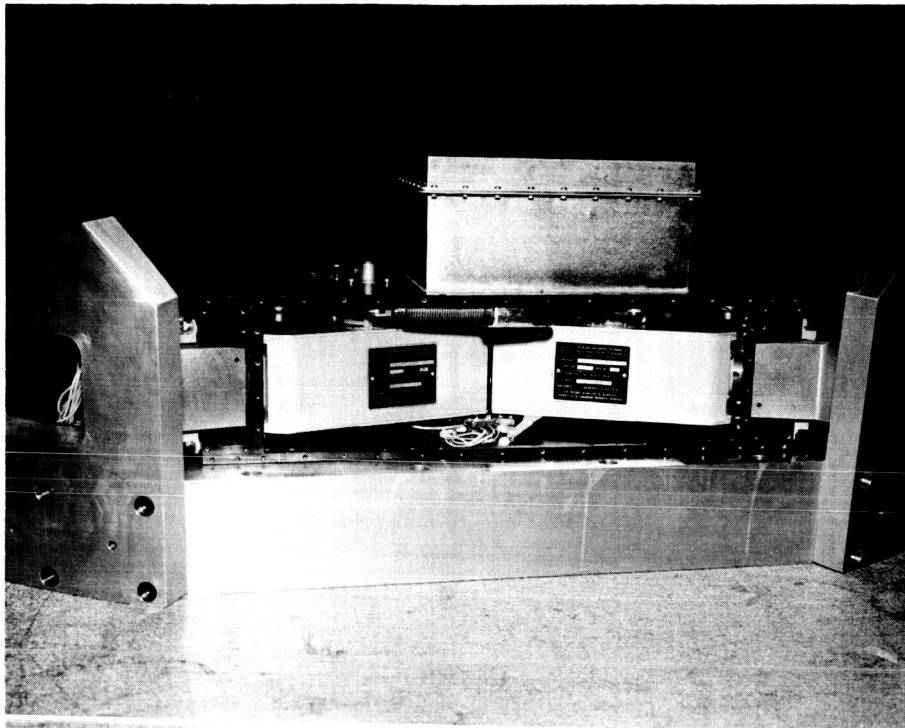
T-1a Primary Boom Assembly Mounted on Vibration Fixture
